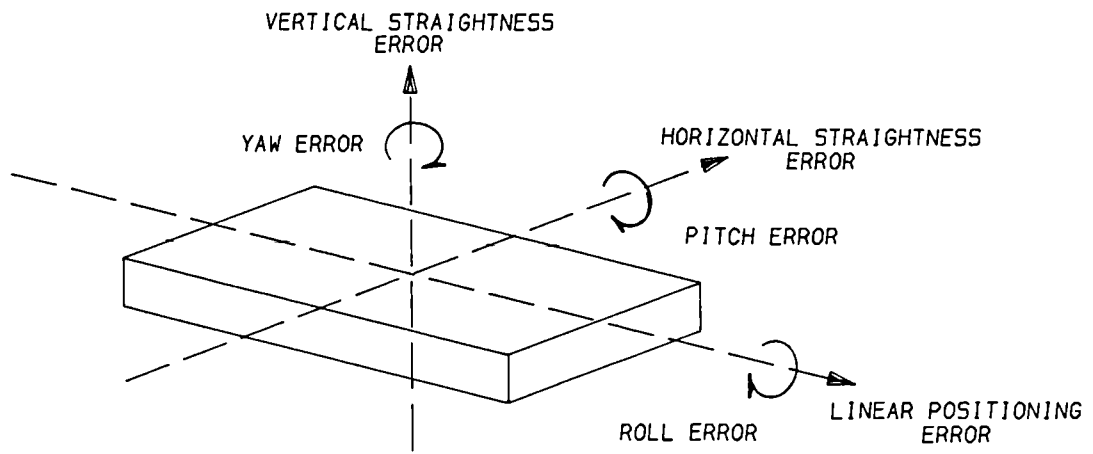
A THE SIX DEGREES OF FREEDOM OF A MACHINE TOOL SLIDE
